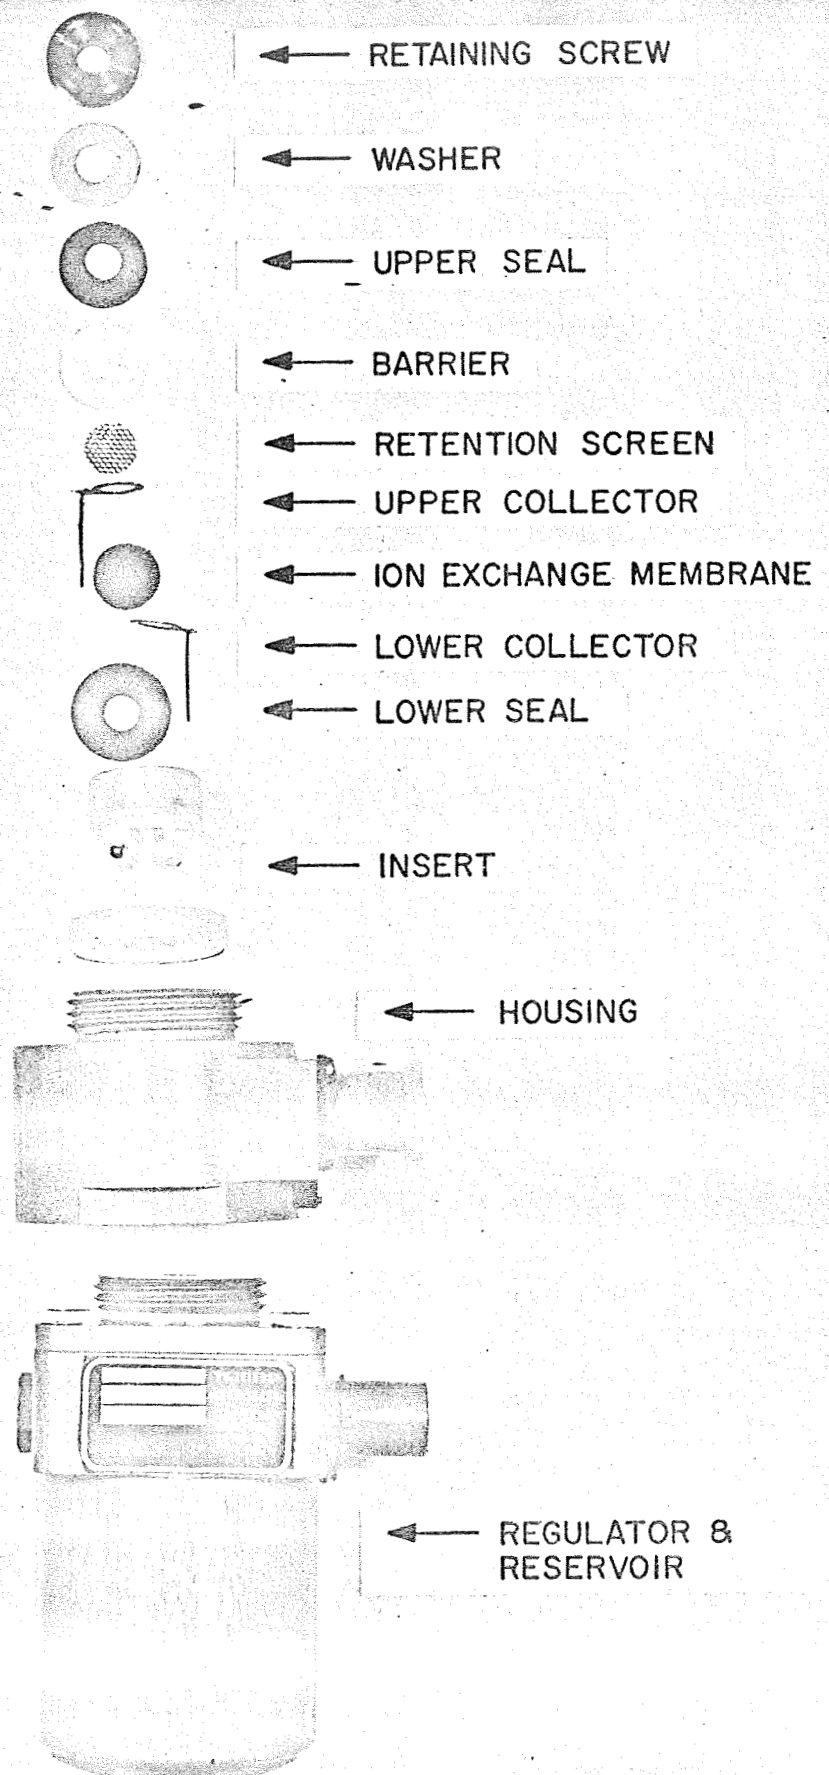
EXPLODED VIEW-OXYGEN SENSOR
